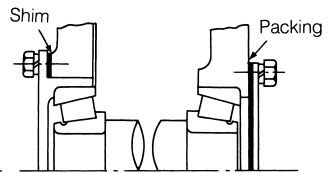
Examples of Clearance Adjusted by Shim Thickness of Outer Ring Cover
